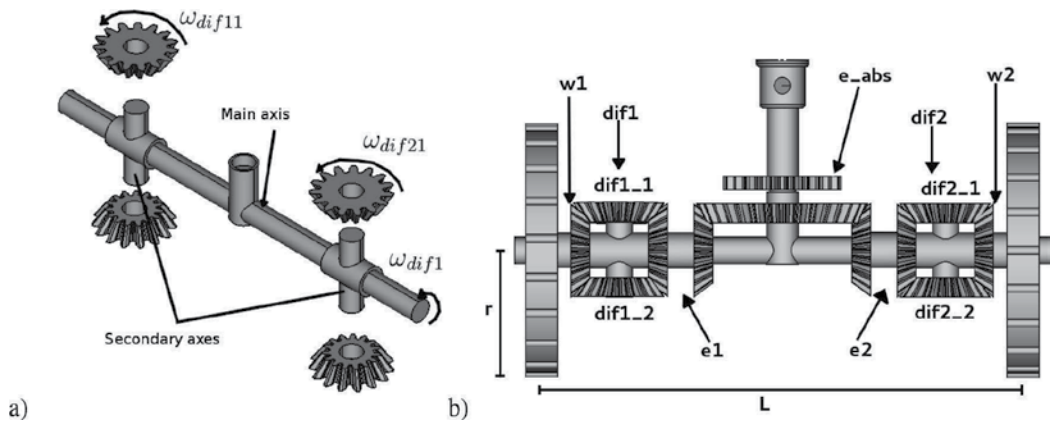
Differential gearing system. a) wheel main shafts, b) absolute direction differential.
